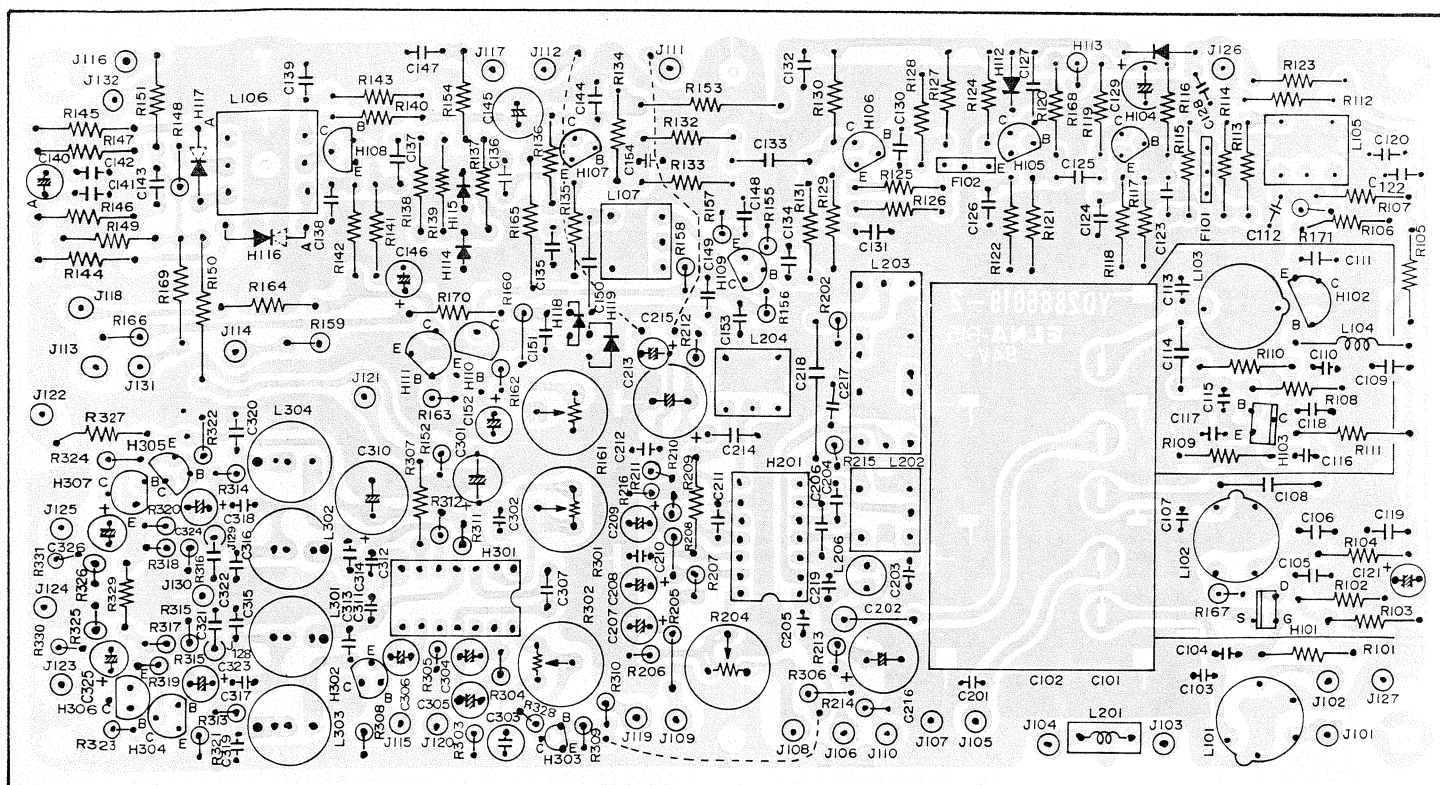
FM/AM Tuner Assembly (P100) Component Locations
